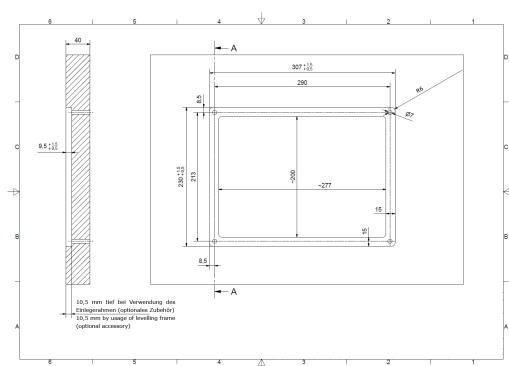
Required installation dimensions on the router table (see page 32 for enlarged view)
